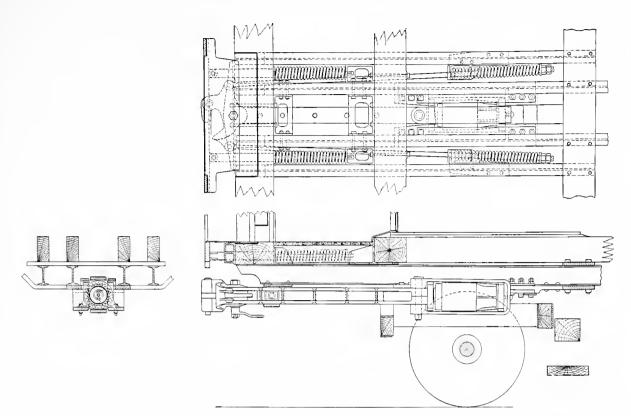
Gould No. 1515. Steel Passenger Coupler. Gould Coupler Co.
